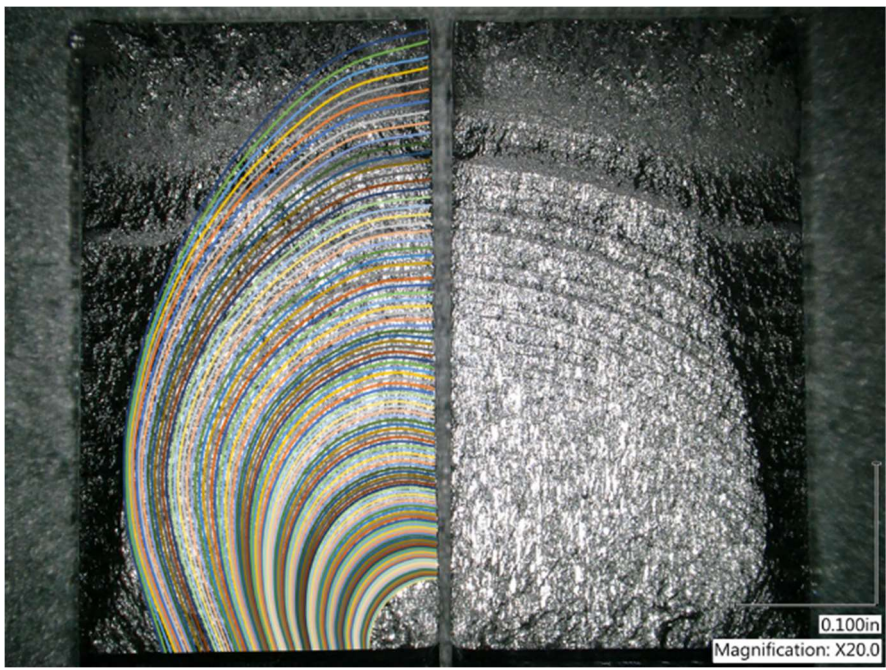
CX140ED-2 fracture surface with overlay of crack progression predicted by BAMF. Mating fracture surfaces are shown. Crack propagation occurred from bottom center, upward and outward for each half of the fracture.
